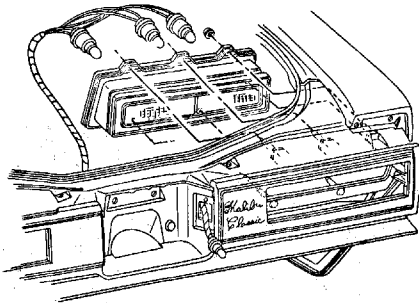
Exterior Lamp Installation - Chevrolet Styles
